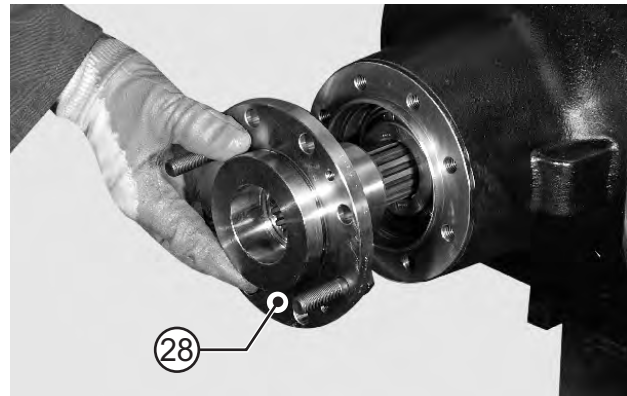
Install the flange (28) onto the pinion (11) without the sealing ring.
